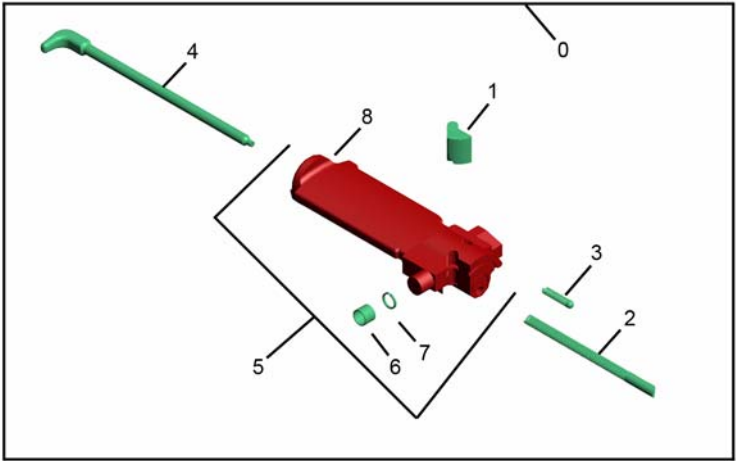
MK 14 MOD 0/1 Bolt Assembly.
